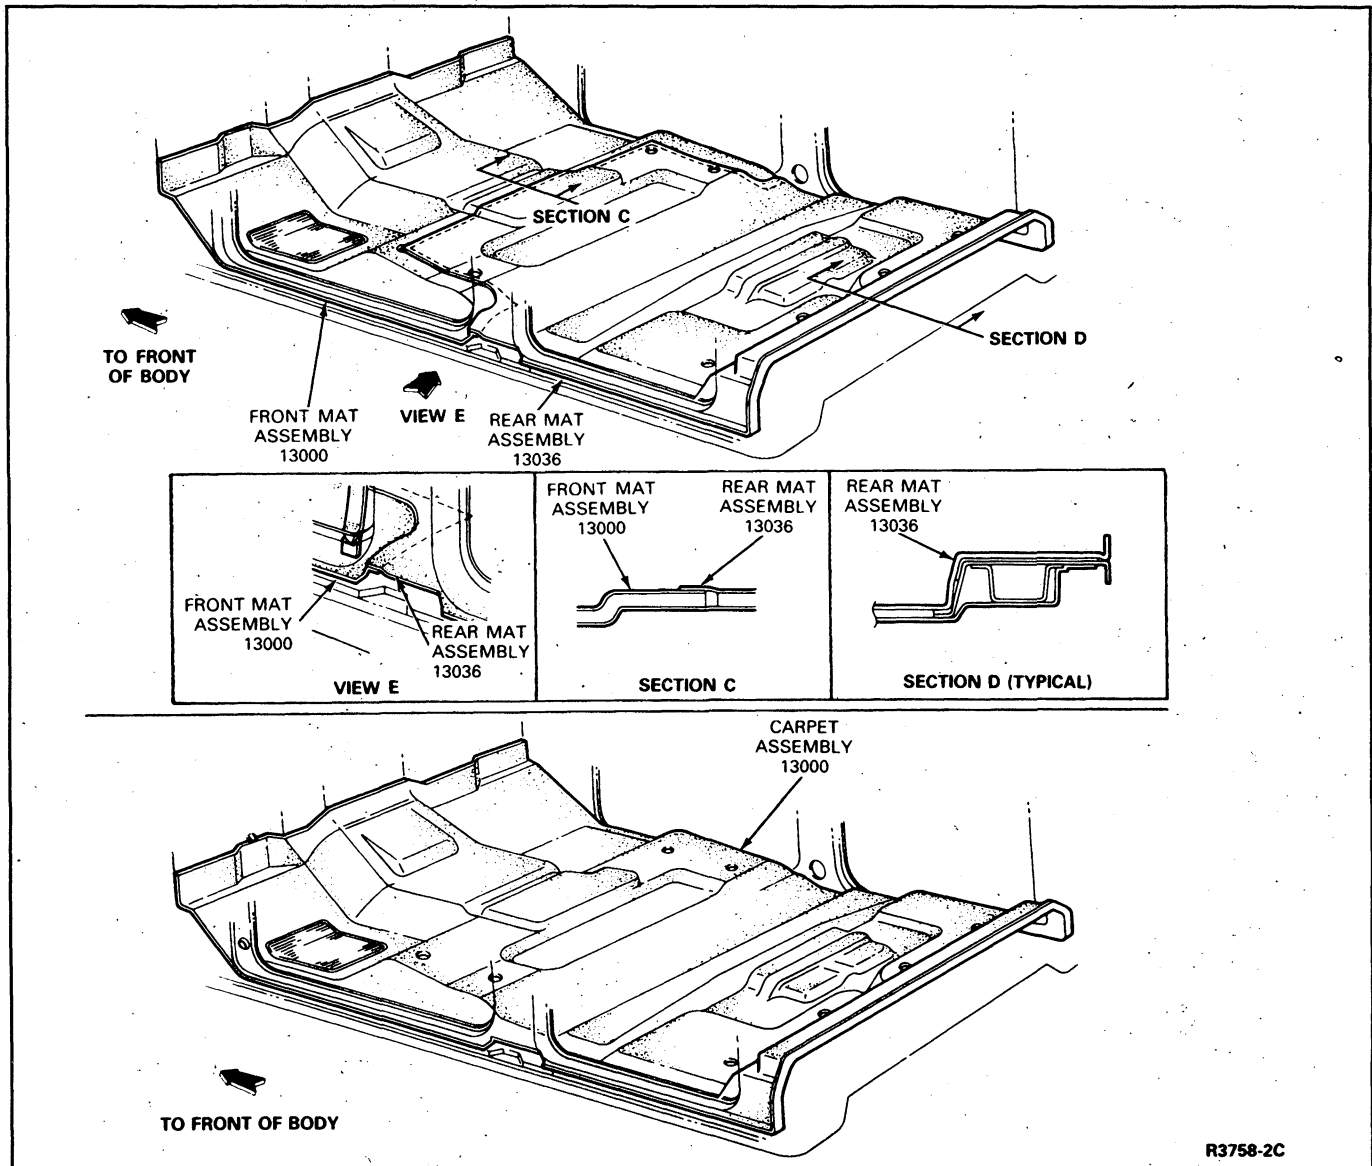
Floor Mat and Carpet—F-350 Crew Cab
